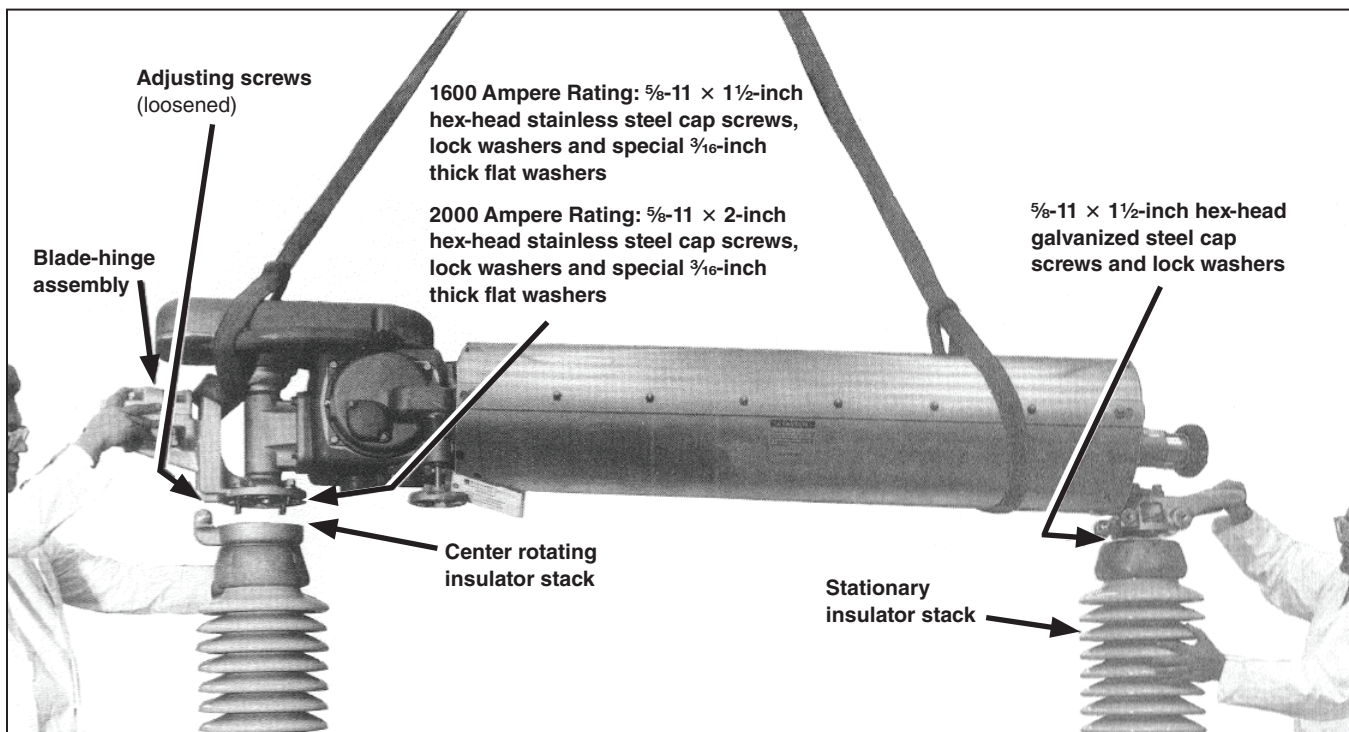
Lifting the brain-and-interrupter assembly into place on the insulator stacks.
